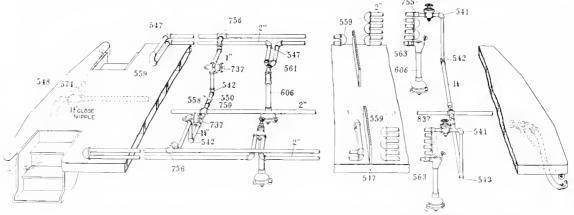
Piping for Gold's Improved Direct Steam System for Heating Combination Passenger and Baggage Cars Fitted with Gold's New Stop Valve Regulators.
